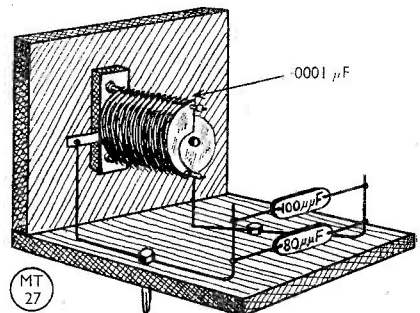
Rear view of the plug-in modification assembly; this is a sketch for guidance only.
